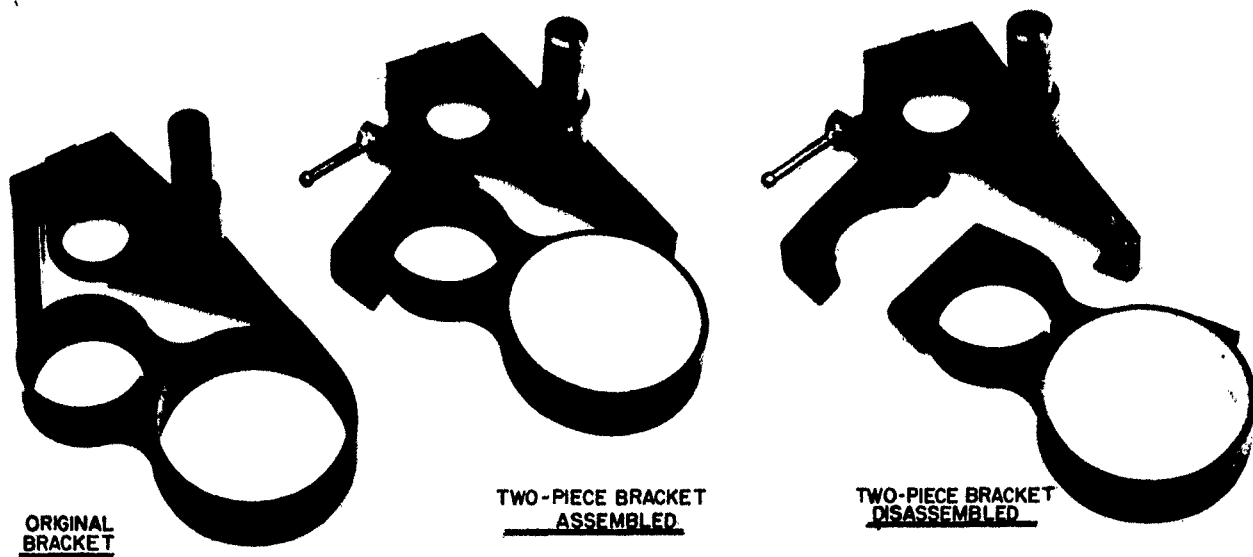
Rear Spotting Rifle Bracket and Sight Mounting Pad.
